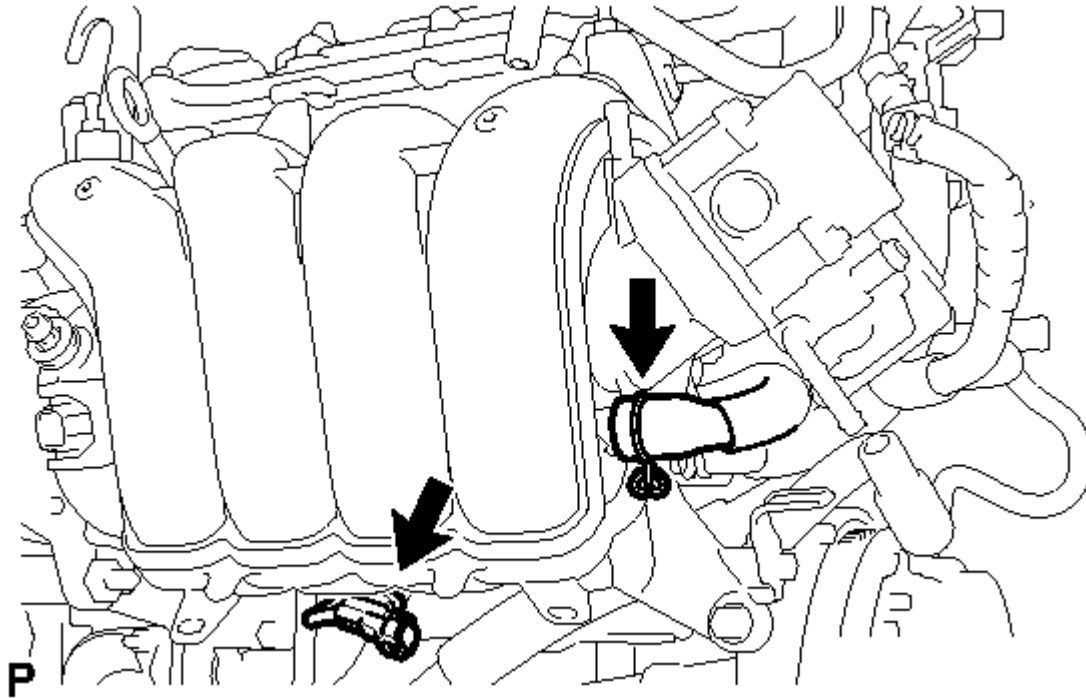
Identifying Ventilation Hose & Wire Harness Clamp
